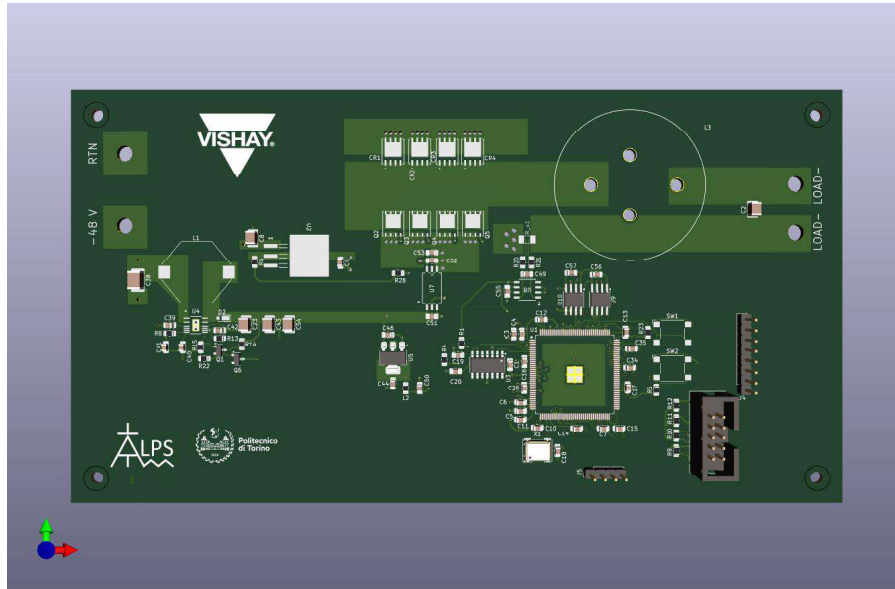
3D-view of the designed Printed Circuit Board.
